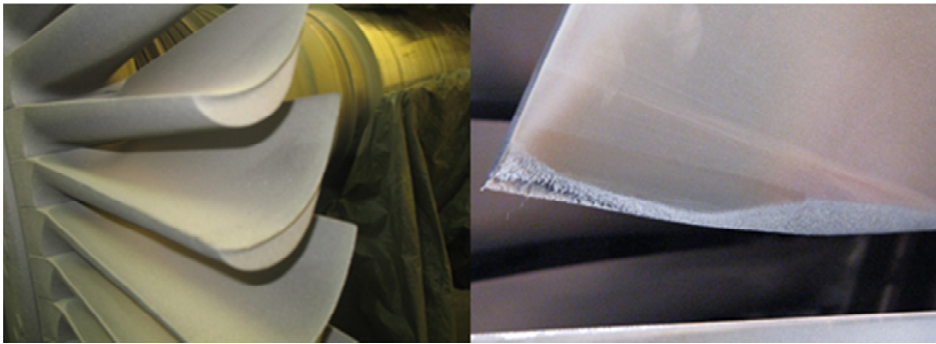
Example of steam turbine rotor blades. Left: design geometry; right: example of one of possible operating degradations
